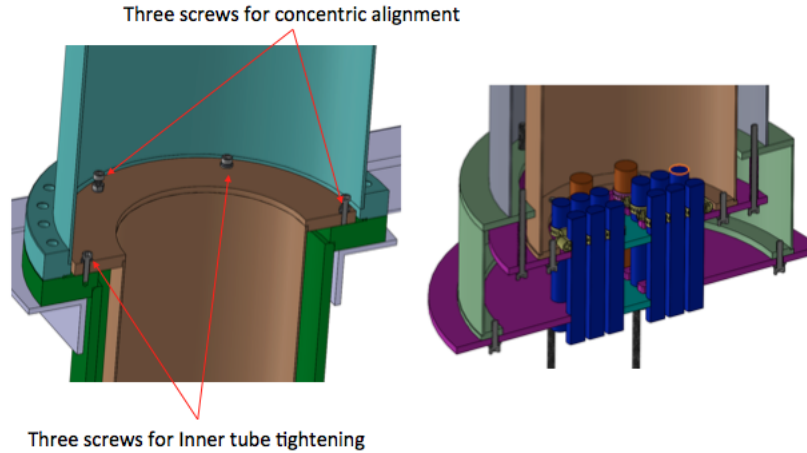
(a) Top attachment of the CTC assembly. (b) Cable support structure at the bottom of the crossing tube.
